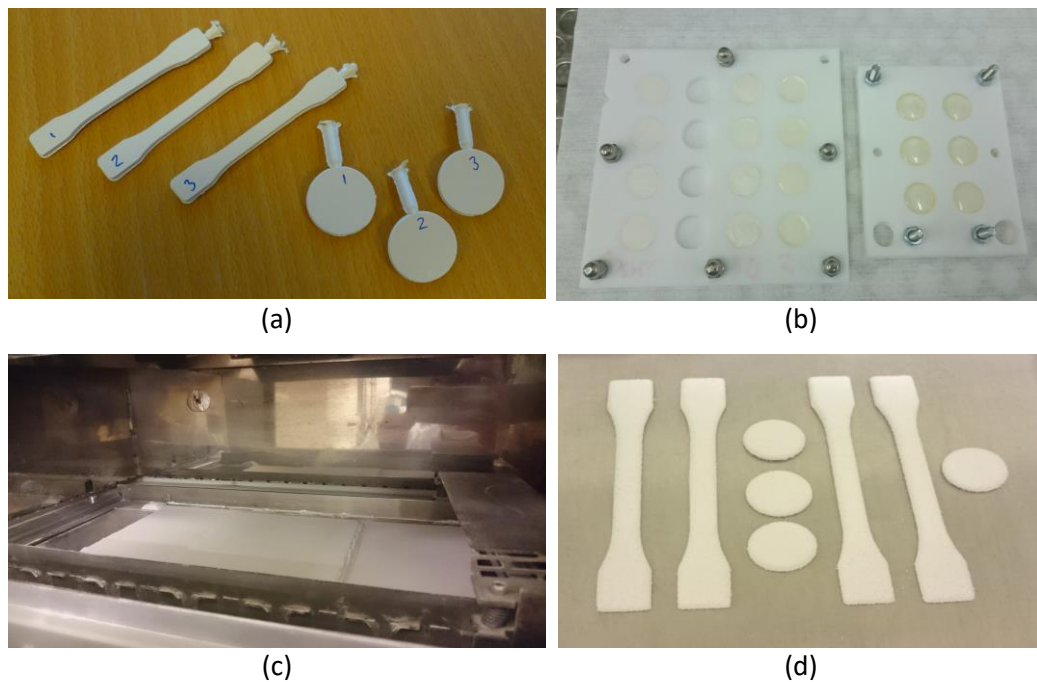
(a) Injection moulded specimens containing 65 wt% BN3 (IM_65BN3); (b) cast specimens in Teflon moulds; (c) PBF 3D printer; and (d) PBF specimens.
